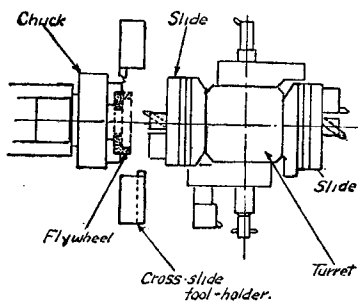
Turret lathe layout, showing use of auxiliary slides
